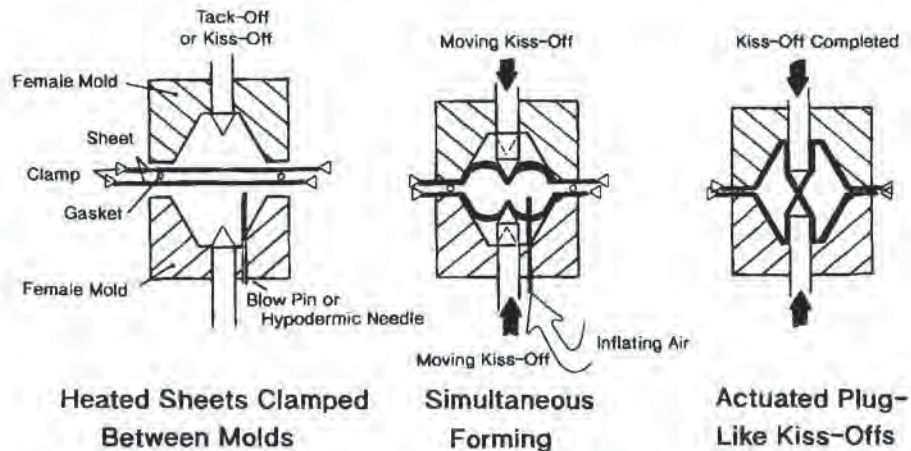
Heavy-gage, simultaneous twin cut sheet thermoforming. Here, blow pins extend through sheet surface and kiss-offs are pneumatically driven during forming
